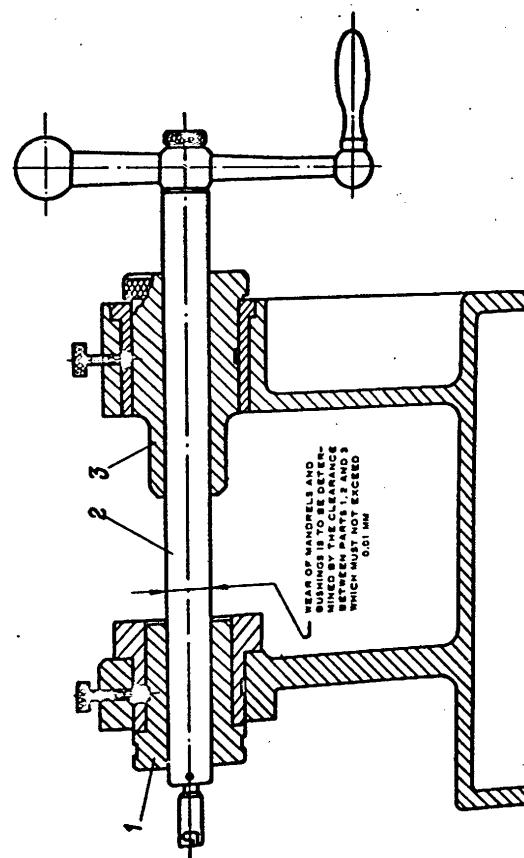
JIG FOR BORING CONNECTING ROD BEARINGS
